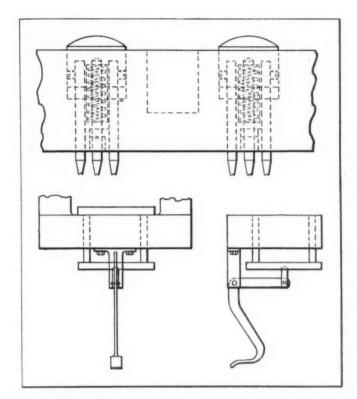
Riveting Machine with Ram Actuated by Compression Spring, the Amount of Pressure on which can be Adjusted
